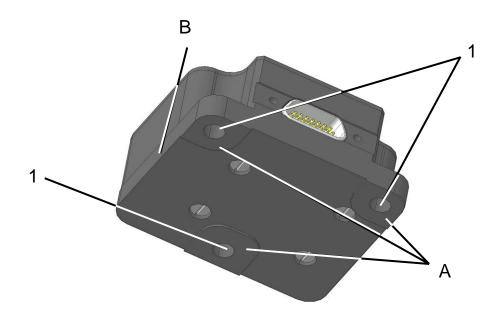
IMU-P mounting surfaces A, B and mounting holes 1
